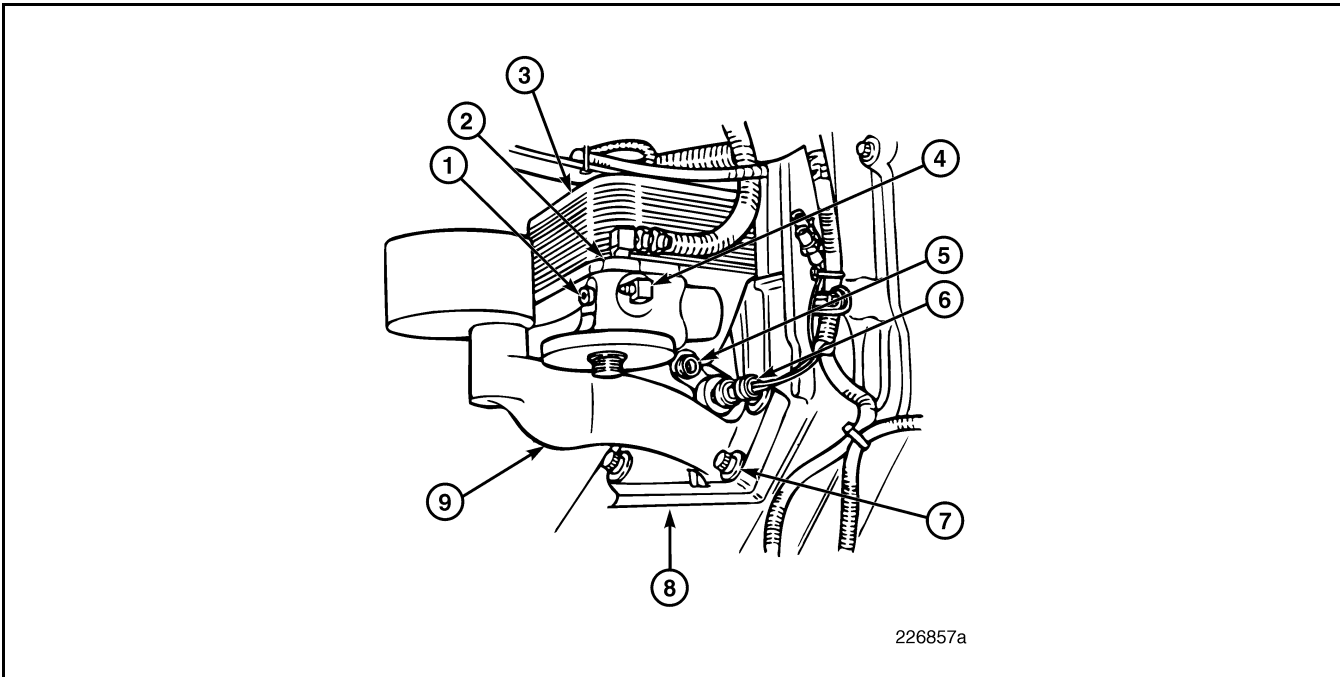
Plate-Type Oil Cooler and Oil Filter Mounting Bracket Installation
